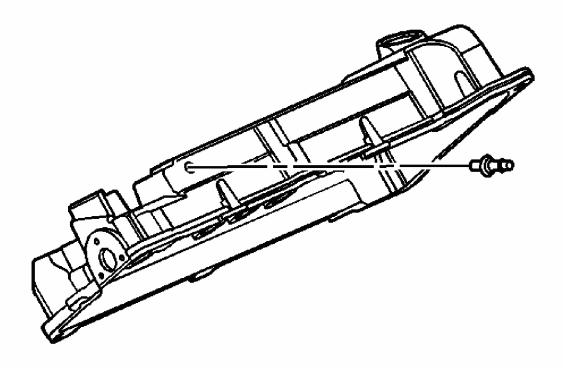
Separating Right Camshaft from Fresh Air Hose Fitting Courtesy of GENERAL MOTORS CORP.
